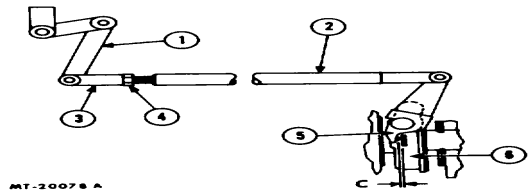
Release Bearing-to-Release Shaft Yoke Clearance (Pull Type Clutch)
